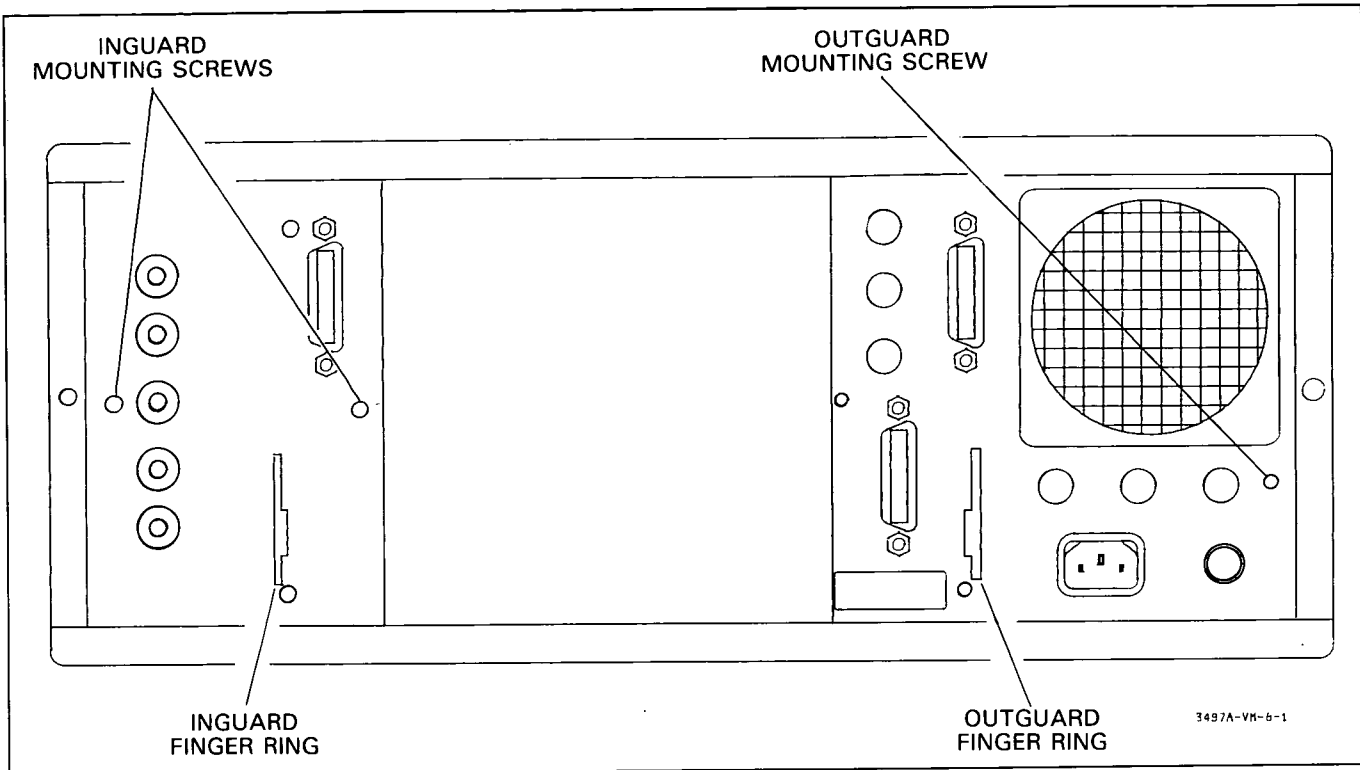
Outguard and Inguard Mounting Screws and Finger Rings
